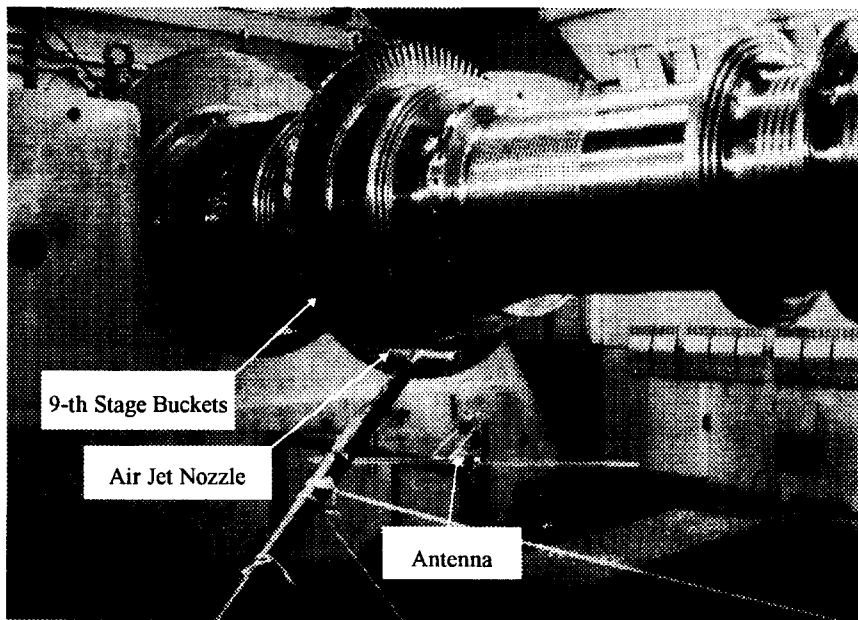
Bucket-Rotor Assembly Installed in Balancing Bunker
